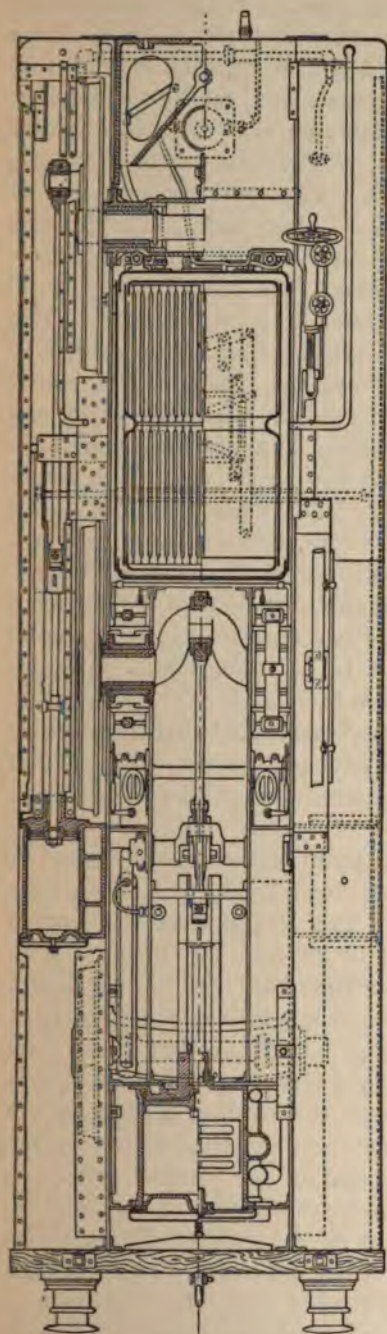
Compound Locomotive (Dreadnought type), designed and constructed by F. W. Webb. Sectional Plan. Scale 1/50th.
